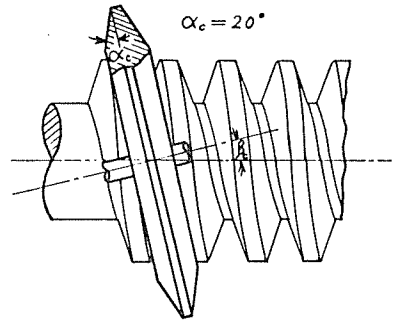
Thread cutting of the type-3 milled worm thread ($\alpha_c = 20^\circ$)
